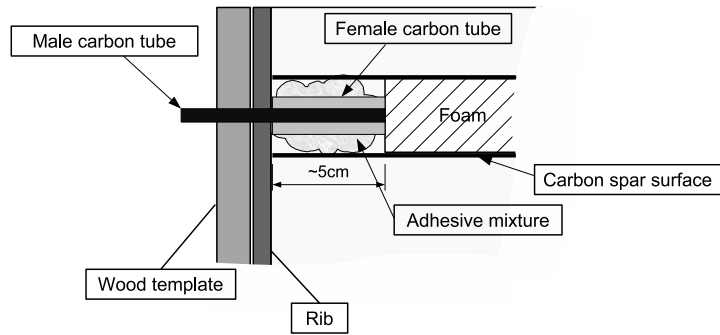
Positioning the tube assembly in the front spar (top view)
